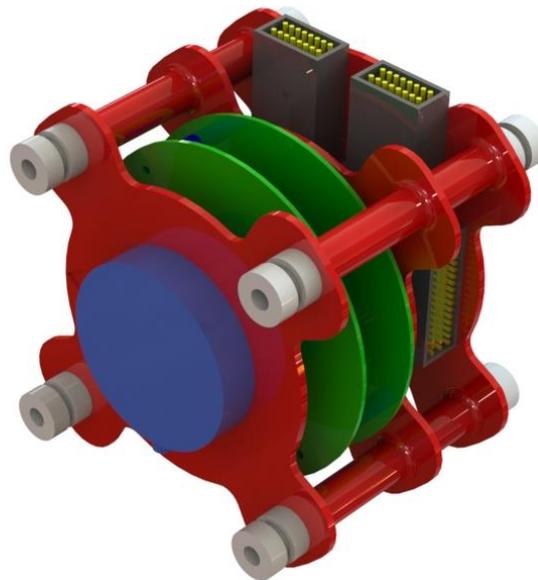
Rendering of Flight and Redundant Recovery Electronics Assembly.
